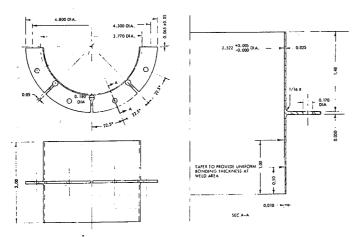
Mounting Bracket Design (Dimensions in Inches).
